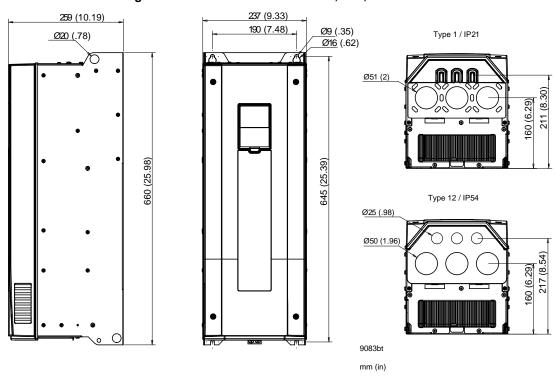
Siemens Drive Dimensions, FS7, Wall-Mount.
